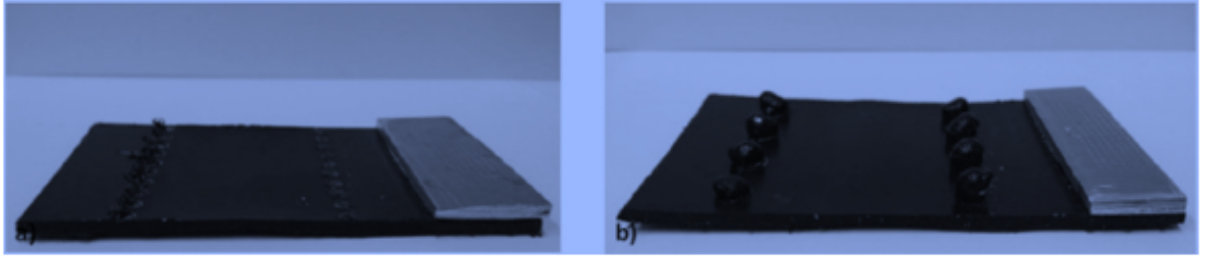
Unraveling failure modes in friction stir welded specimens: (a) shearing of protrusions, (b) sheets separation.
